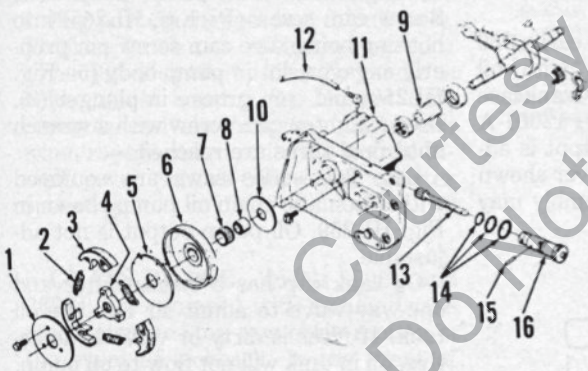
Exploded view of oil pump assembly used on later 360 series and clutch used on some later 360 models.
